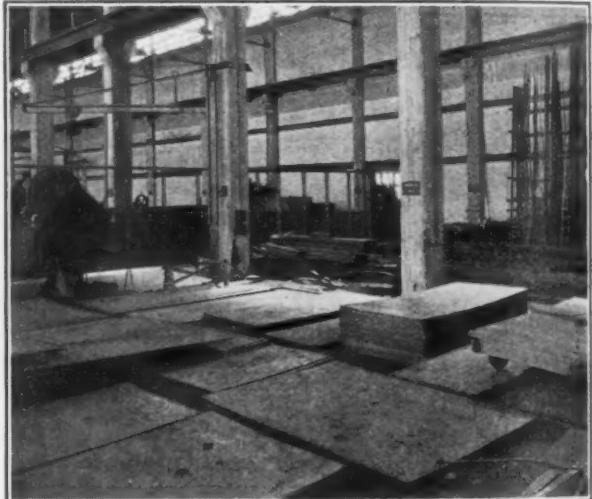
Department for the Handling of Raw Steel Stock and Its Storage
